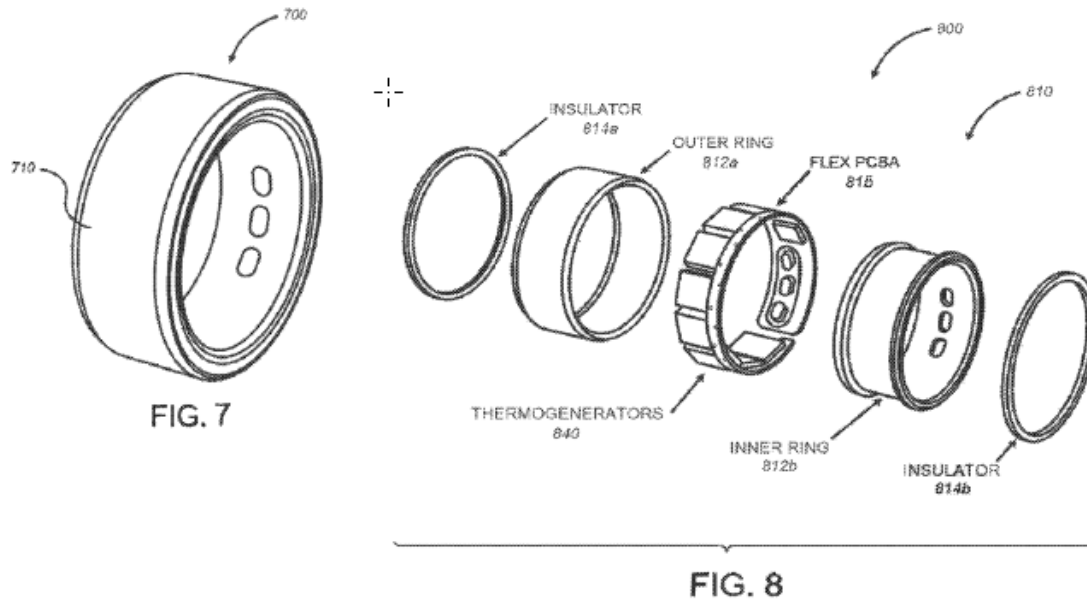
is a perspective view of a WCD, and Figure 8 is an exploded view of the WCD of Figure 7. Ex. 1001, 5:36–40, 15:1–3. Figures 7 and 8 illustrate a design of the housing for the WCD, where the ring includes outer ring 812a, inner ring 812b, and insulators 814a and 814b. *Id.* at 15:3–6. Also shown in Figure 8 are flexible PCBA 815 and thermogenerators 840. *Id.* at Fig. 8. According to the '702 patent, a thermoelectric generator charges a battery of the WCD by the difference between a wearer's body temperature and the ambient temperature. *Id.* at 14:64–15:1, 15:7–15.
